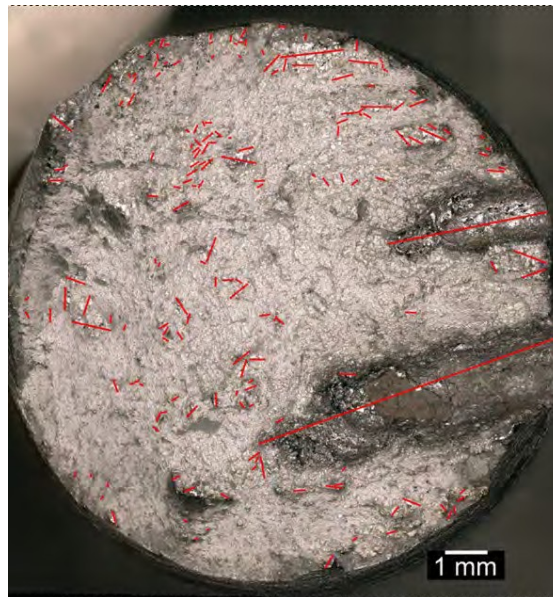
Large gas holes on fracture surface of test specimen
